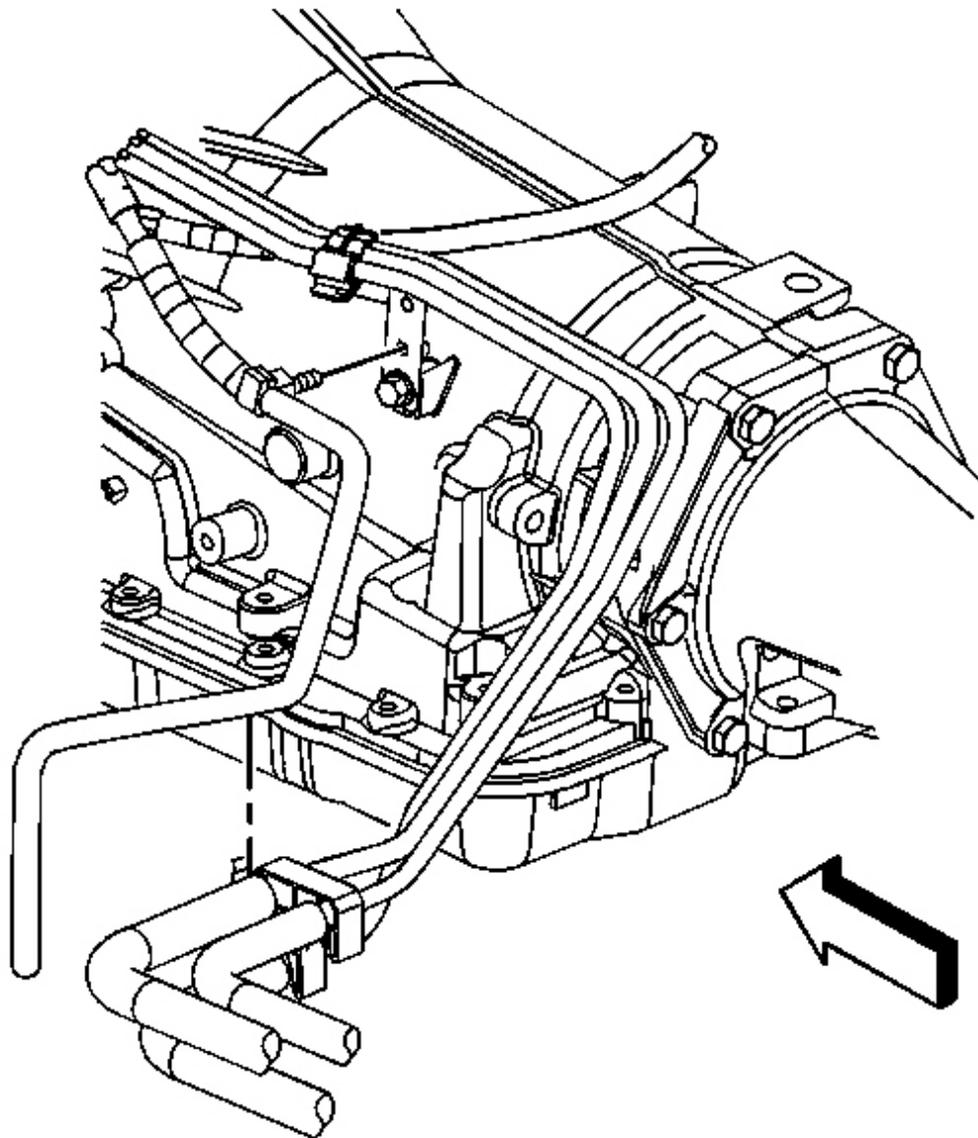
Locating Bolt That Secures Fuel Line Bracket To Left Side Of Transmission
